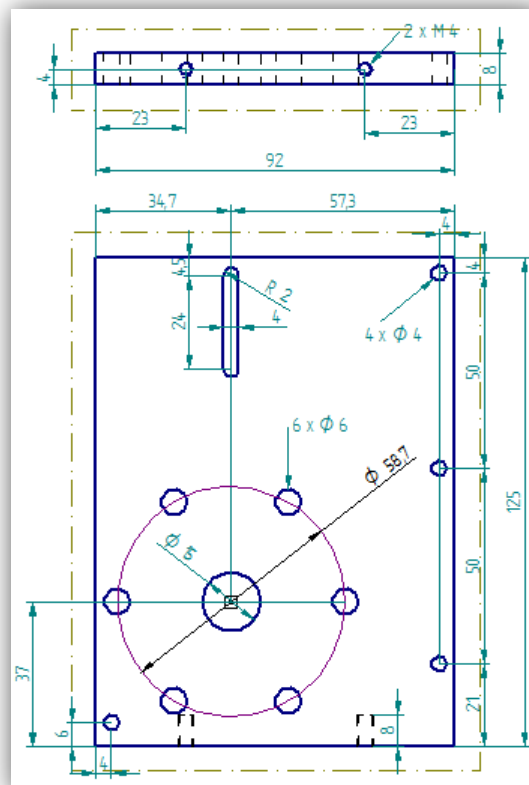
Views of the Solid Edge assembly. The details of the future construction can be seen.
